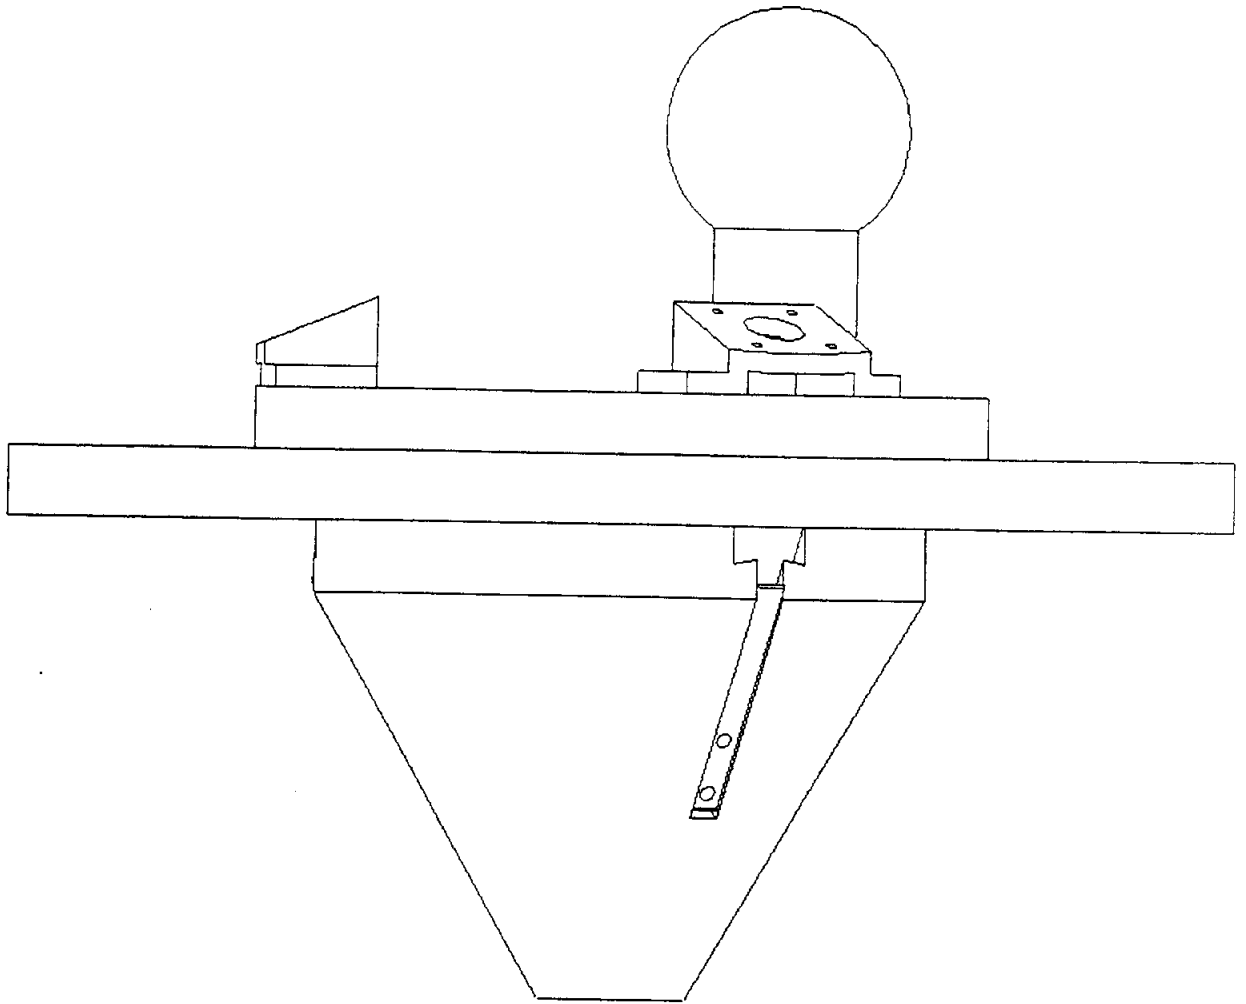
Side View of Boot In Chock Showing Clamping Devices Released
